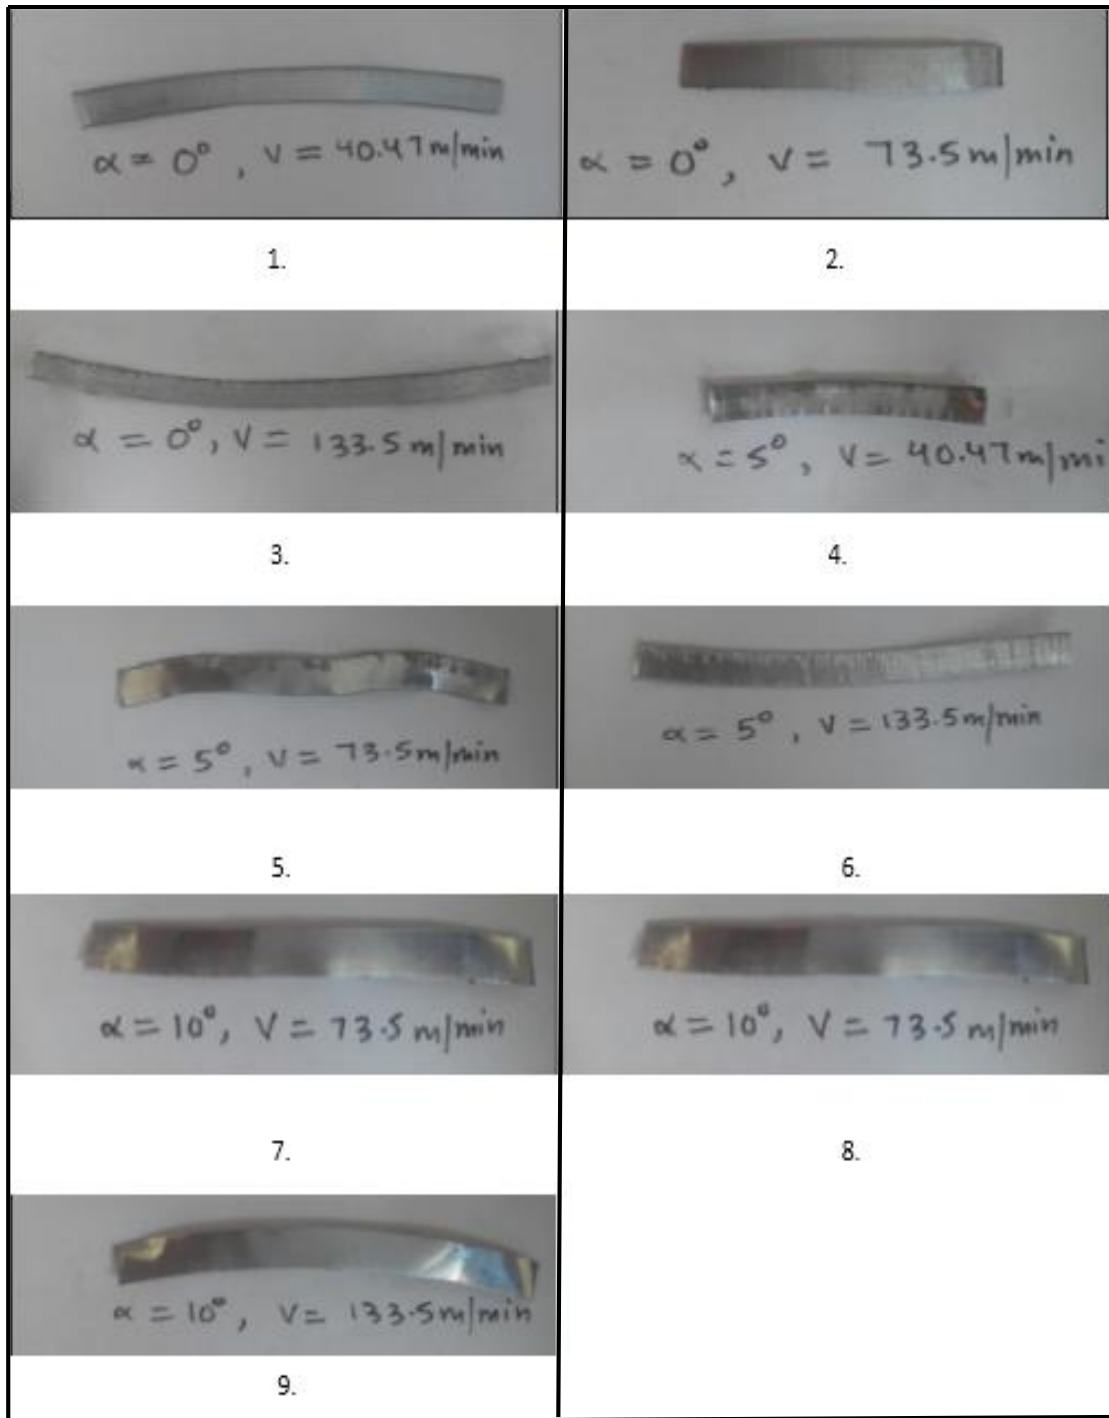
Strips of Al6063 alloy fabricated at different machining conditions (1-9)
